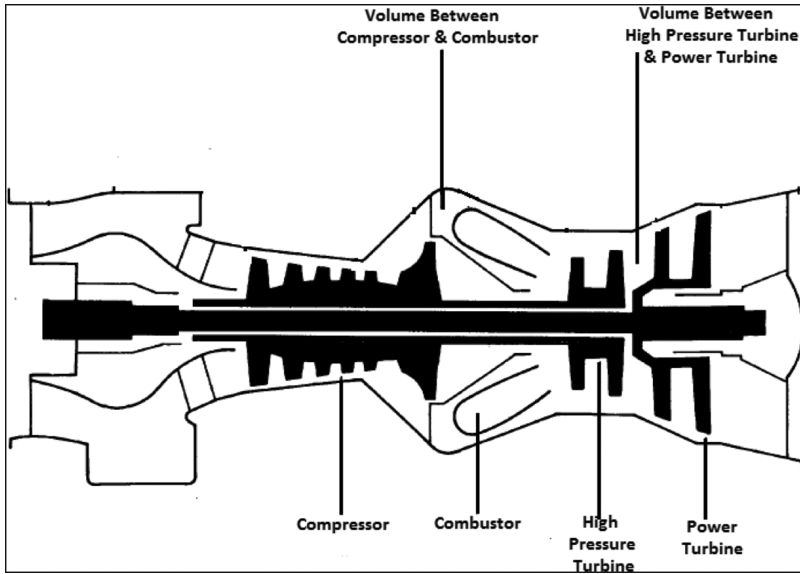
Cross-sectional view of GE T700 turboshaft engine.
